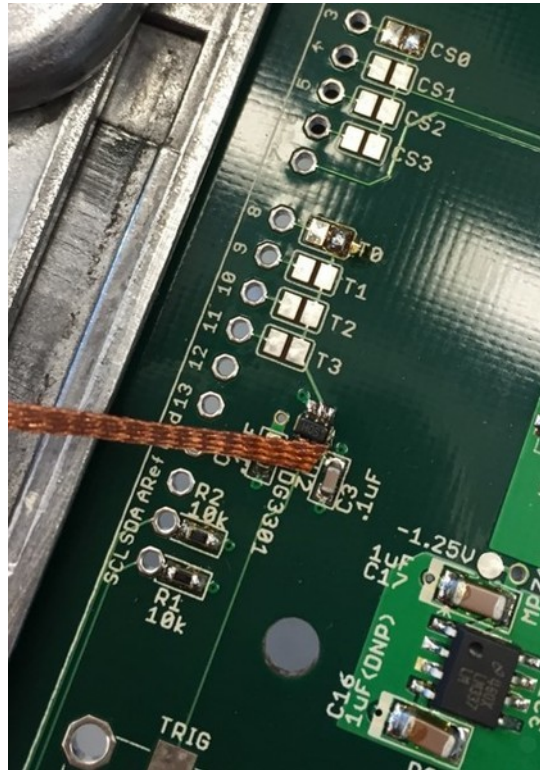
Place the copper braid over the solder blob and then press with the soldering iron. You should see the excess solder wick up the copper braid.
